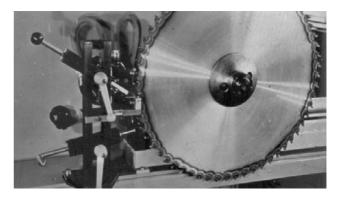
Brazing hard metals onto a saw blade with HF-heating (clearly visible, restricted heating; brazing alloy - BrazeTec 49/Cu; flux - BrazeTec special h.
